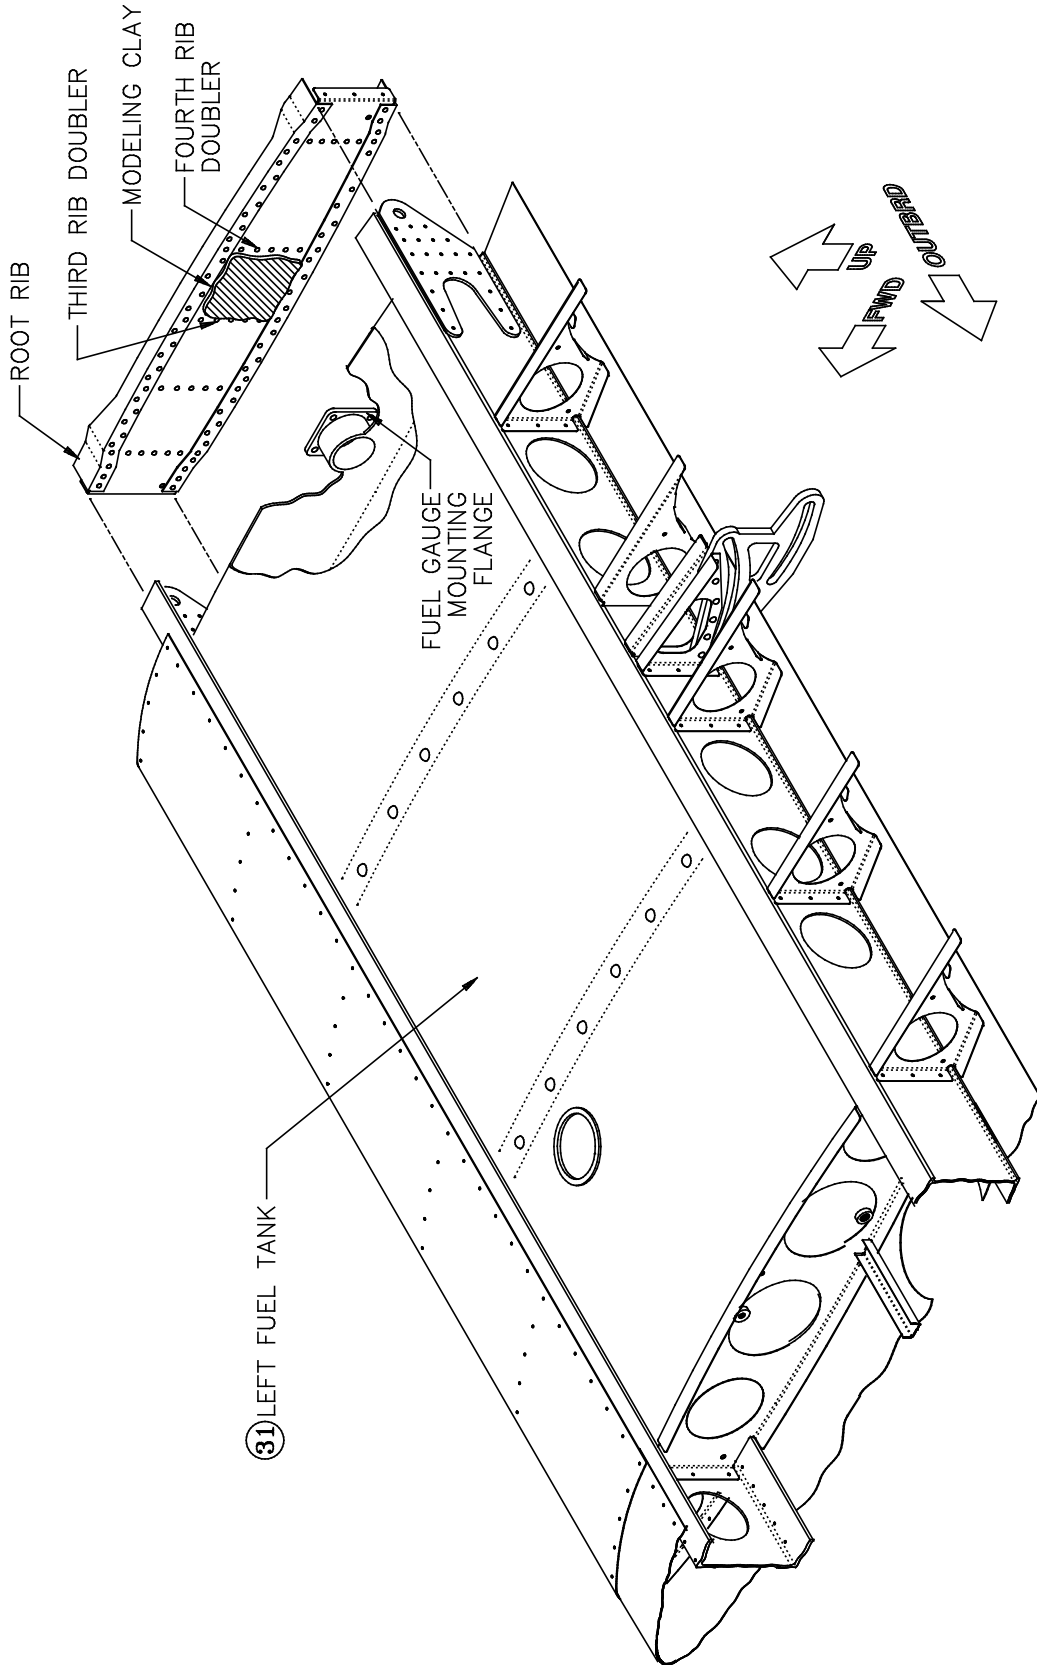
Taking an Impression of the Fuel Gauge Mounting Flange on the Root Rib
